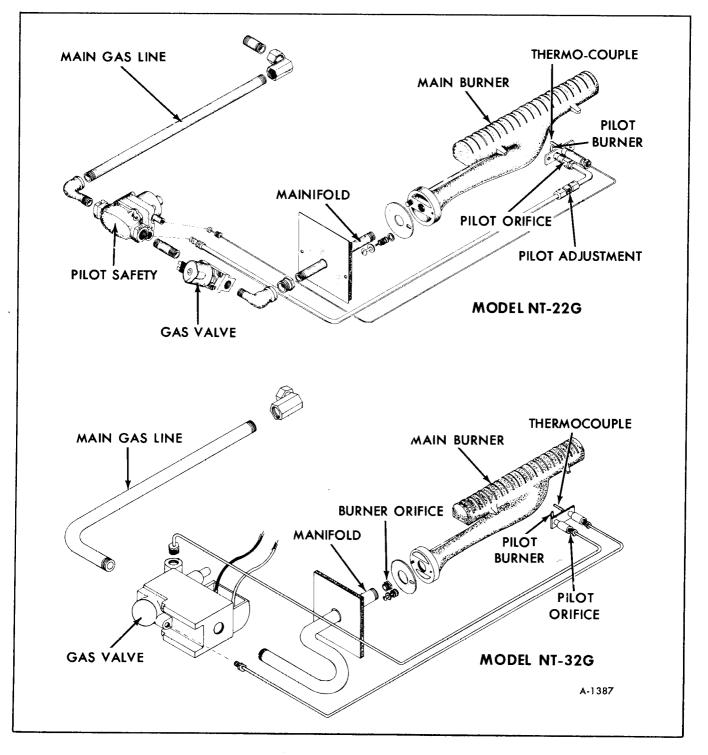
(NT-22G and NT-32G) Valve and Burner Assemblies
